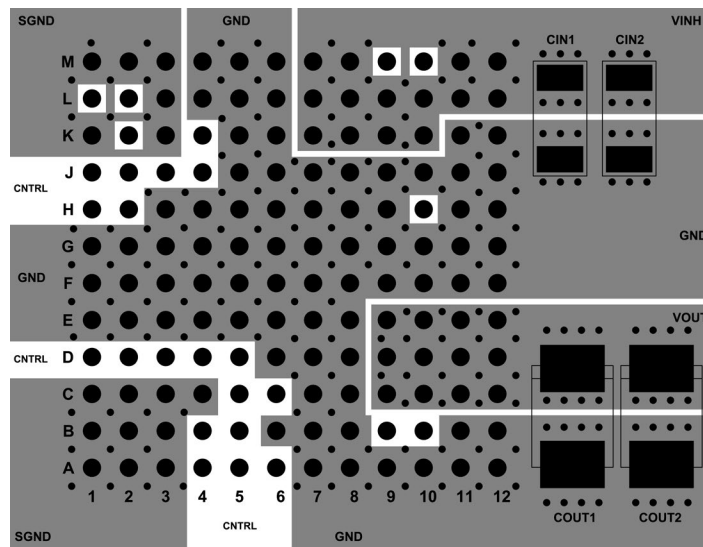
Recommended PCB Layout, Figure 45 Circuit. View of the LTM4641 from Top of Package
